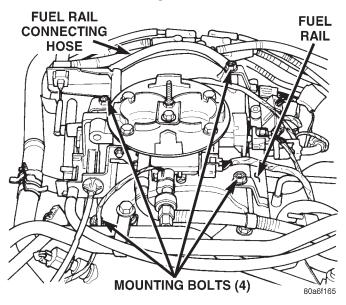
Fuel Rail—Typical 5.2L/5.9L Engine
